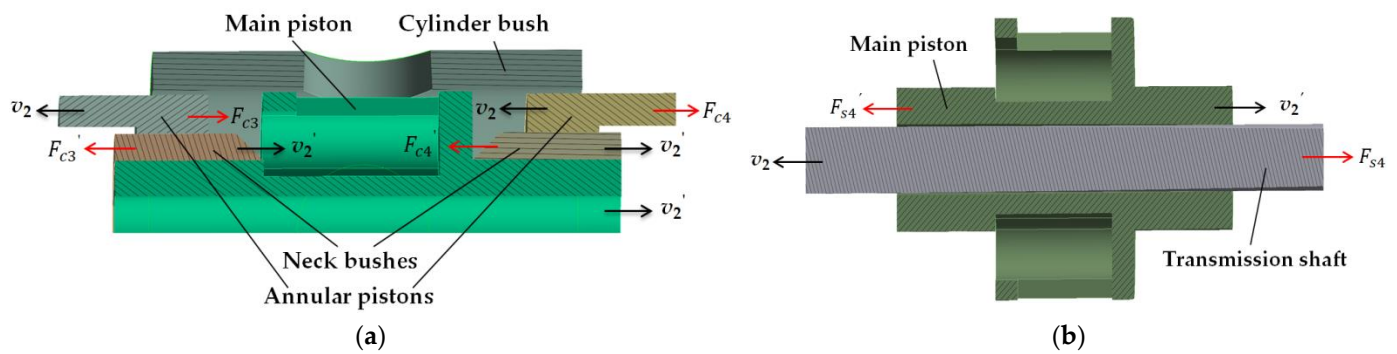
The axial shearing forces: (a) between the annular pistons and neck bushes; (b) between the main piston and transmission shaft.
